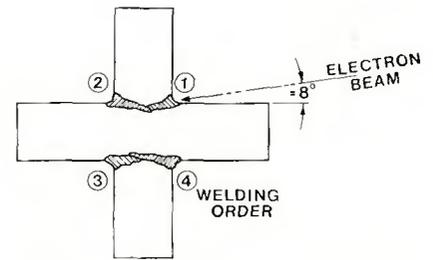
Cruciform weld sample used to test high restraint electron beam welds
